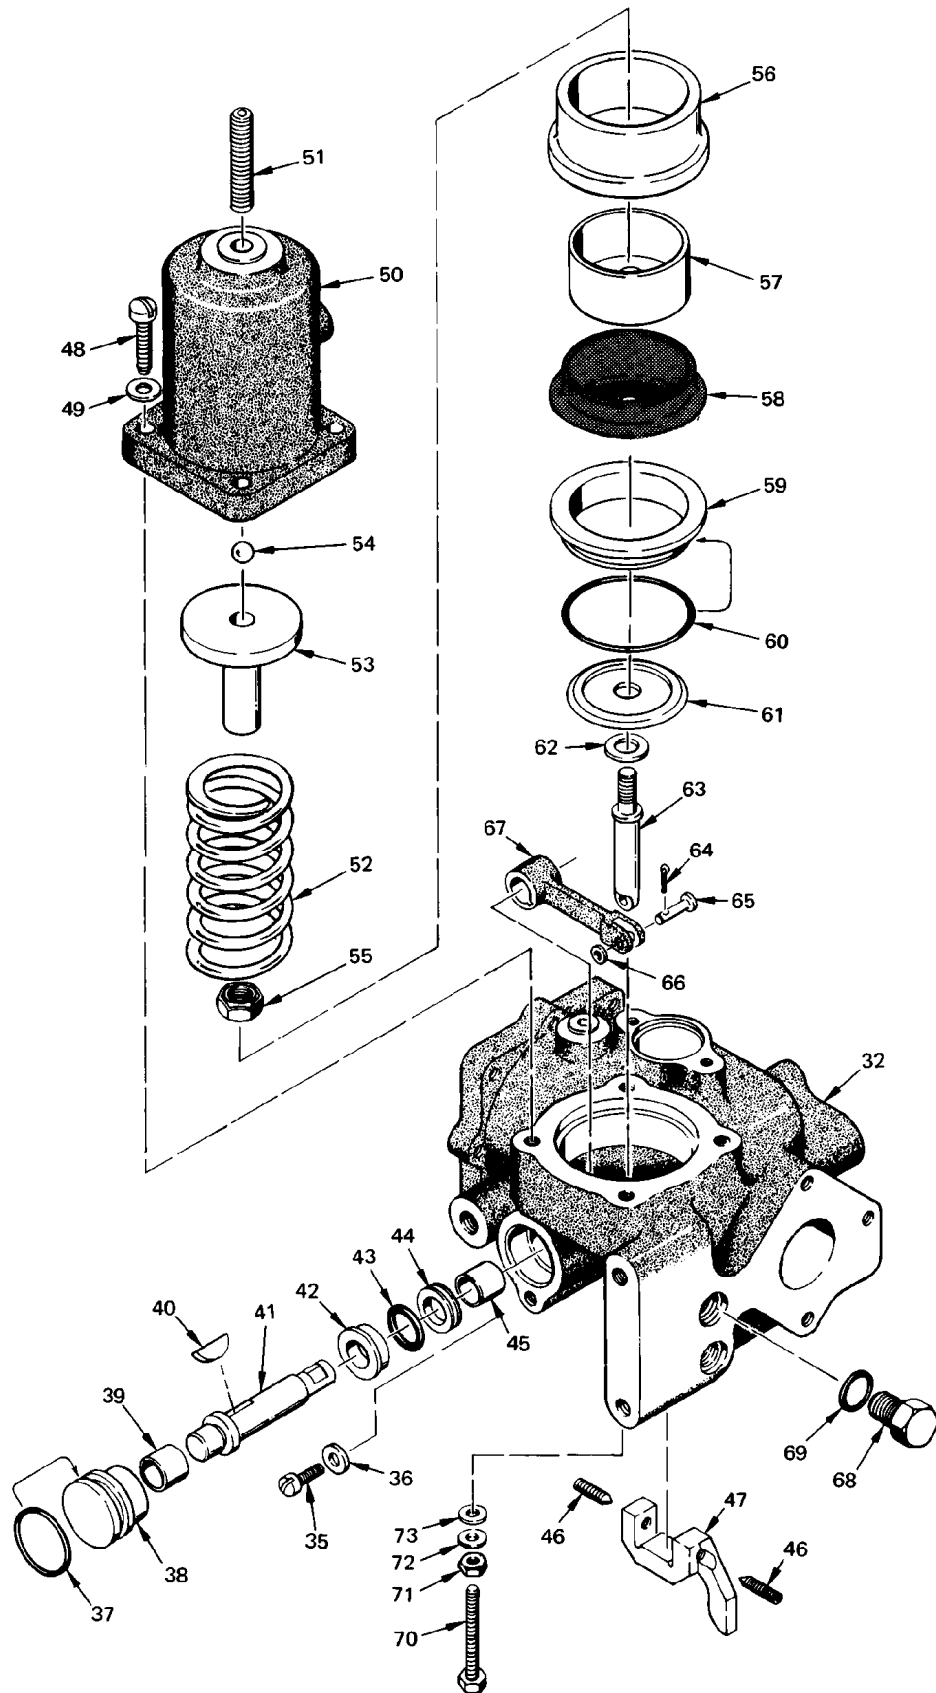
Exploded View of Gaseous Fuel Valve/Limiter (sheet 2 of 2)
